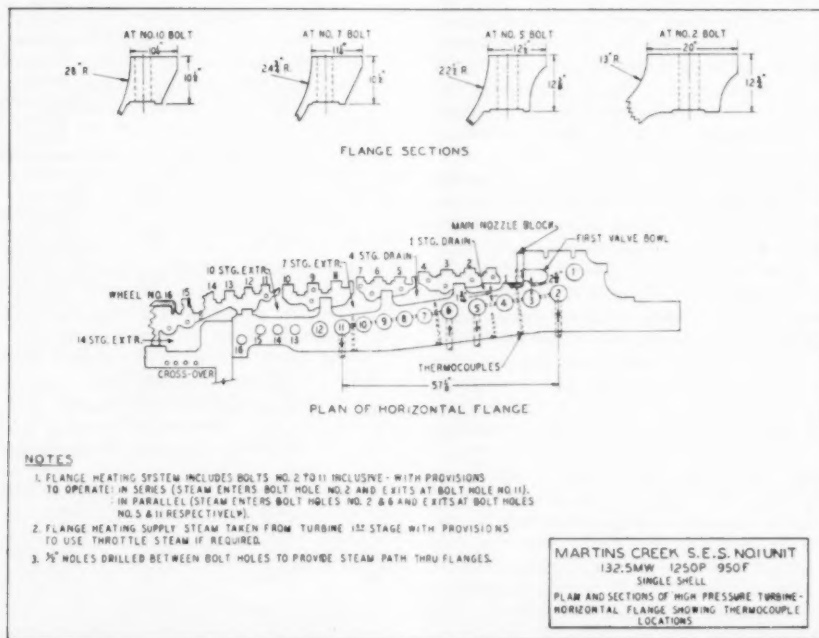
Showing how first valve bowl intersects horizontal flange near nos. 2 and 3 flange bolts
